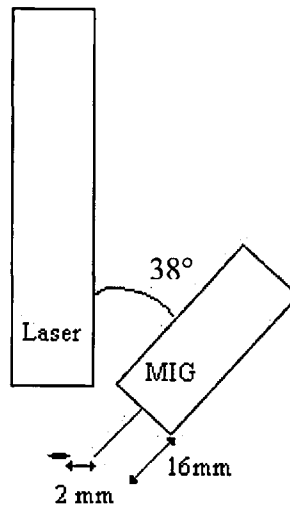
Schematic Diagram of Laser and GMAW setup for the Laser Hybrid Welding process
